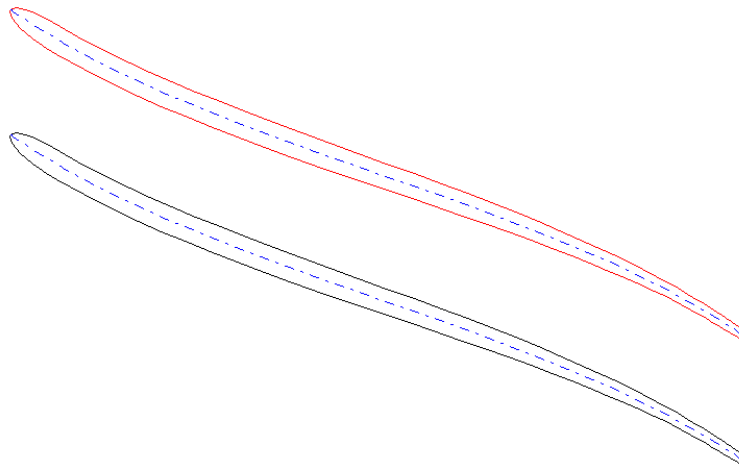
Auxiliary View of the Centrifugal Compressor
